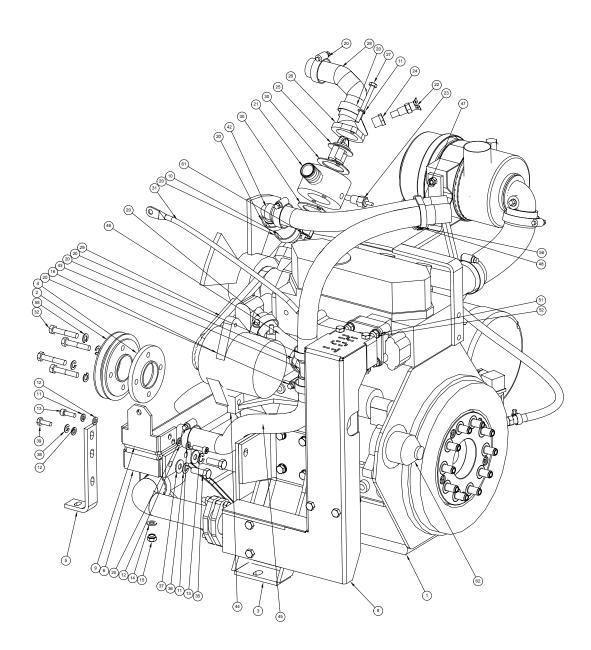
Engine Assembly CTS 450 Diesel - Left View D-5866 Rev C
